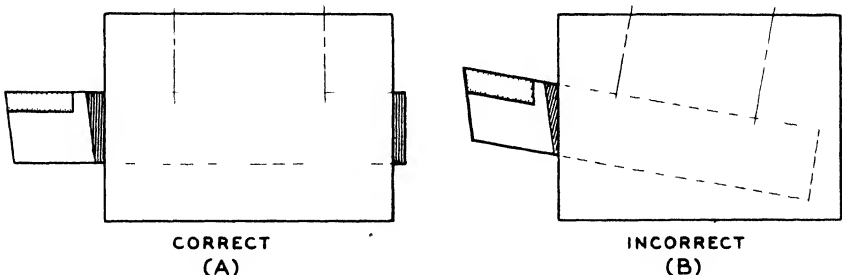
The Right and Wrong Way To Hold Tools in the Block-Type Tool Holder
